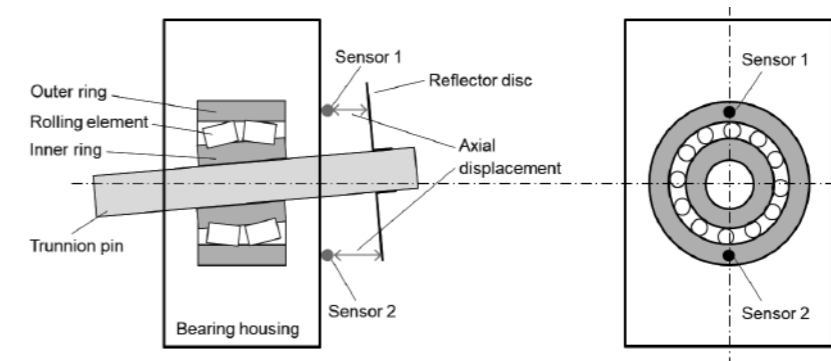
Monitoring of axial displacement at converter main bearing expansion side.
